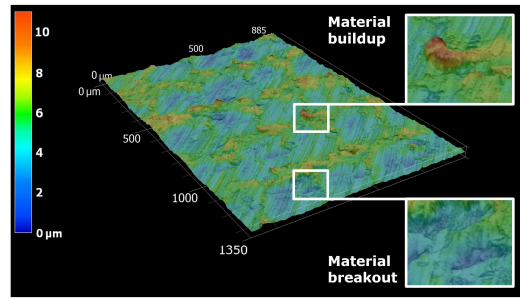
Typical tool wear-related material buildup and breakout evident in the topography of the surface produced by tool no. 3 with CM at $v_c = 70$ m/min and $f_z = 0.055$ mm/z after $V_c = 2500$ mm³.
